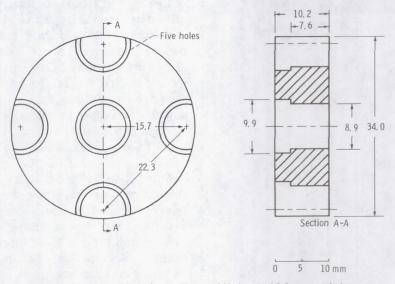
Flameholder configuration for 73 percent blockage and 9.9-mm counterbore. (All dimensions in mm.)
